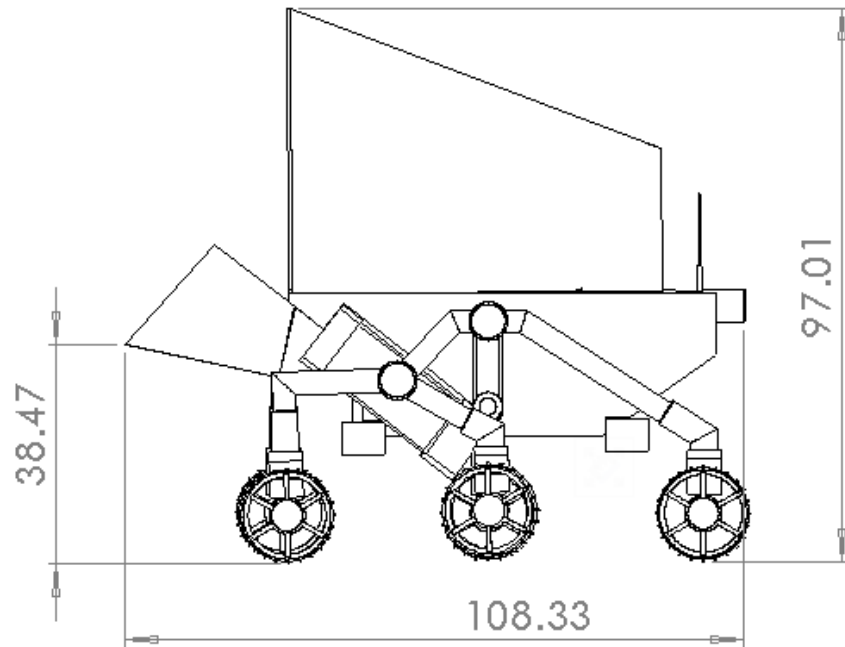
Dimensioned (mm) CAD model of the rover suspension and RIMFAX in full extension, prior to extending solar panels.
